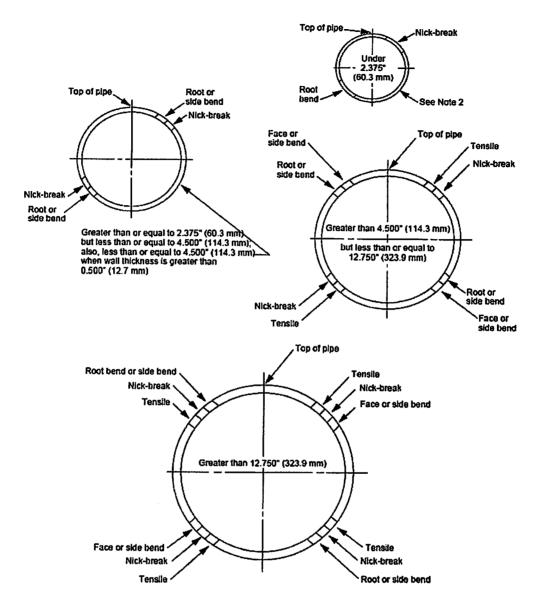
Location of Test Butt-Weld Specimens for Welder Qualification Test
